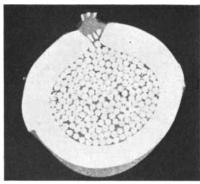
Photomicrograph showing a cross section of an alumnum cable soldered by immersing it in a molten bath of 70% Zn 30% Sn solder using a liquid flux developed by Kaiser Aluminum. 5X.
